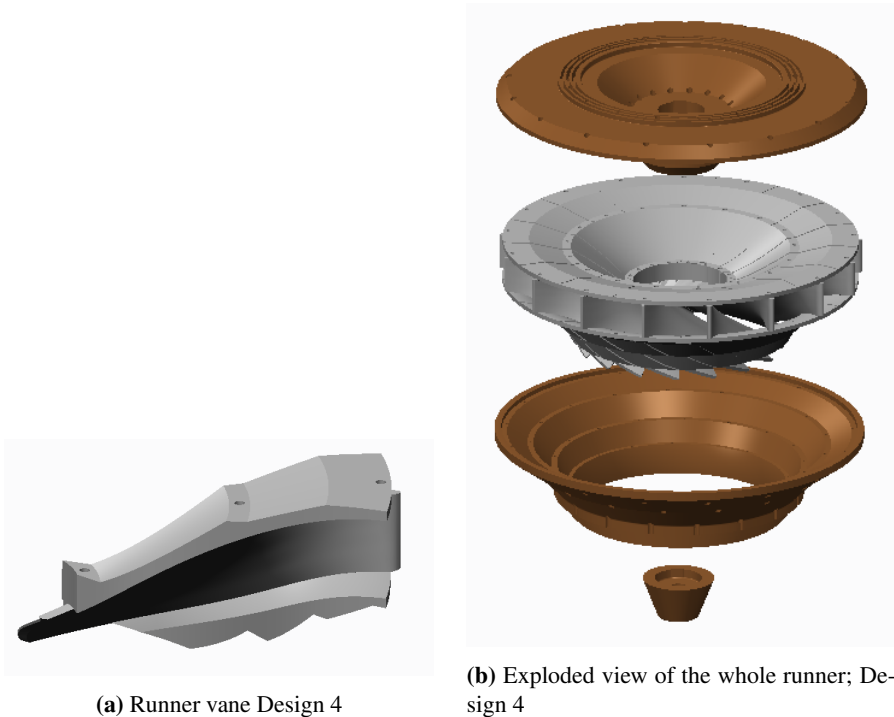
3D-model of the Runner and runner vanes Design 4
